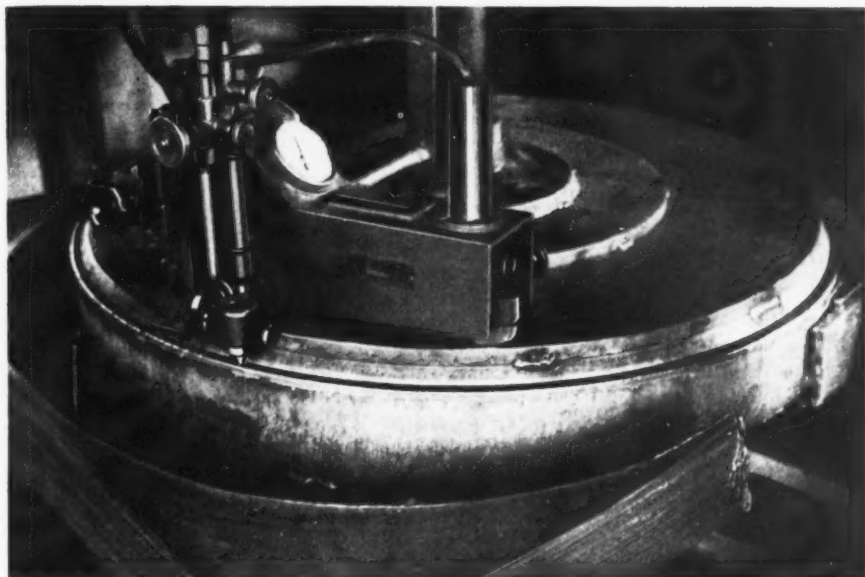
A 1 1/2-inch Thick Clamping Plate Applies Pressure Evenly to the Stack while the Cutting Machine is Guided by a Radius-rod
